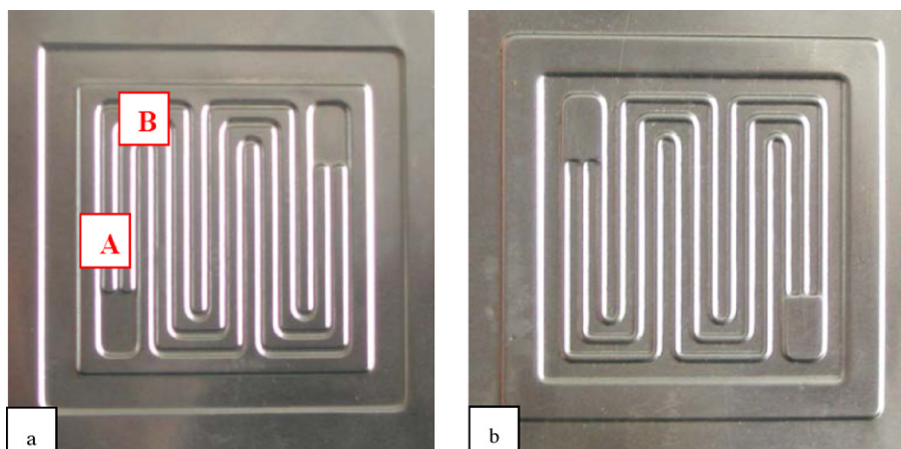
(a) Front and (b) back view of a metal bipolar plate fabricated by the rubber pad forming process.
